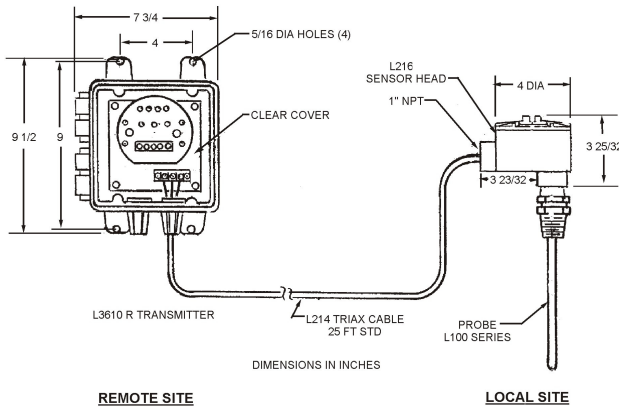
L4610R Dimensional Drawing (Remote Unit)
